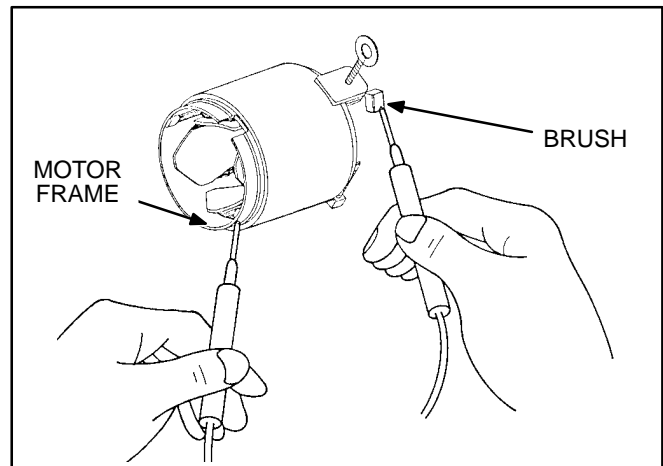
CHECKING MOTOR FRAME WINDINGS
